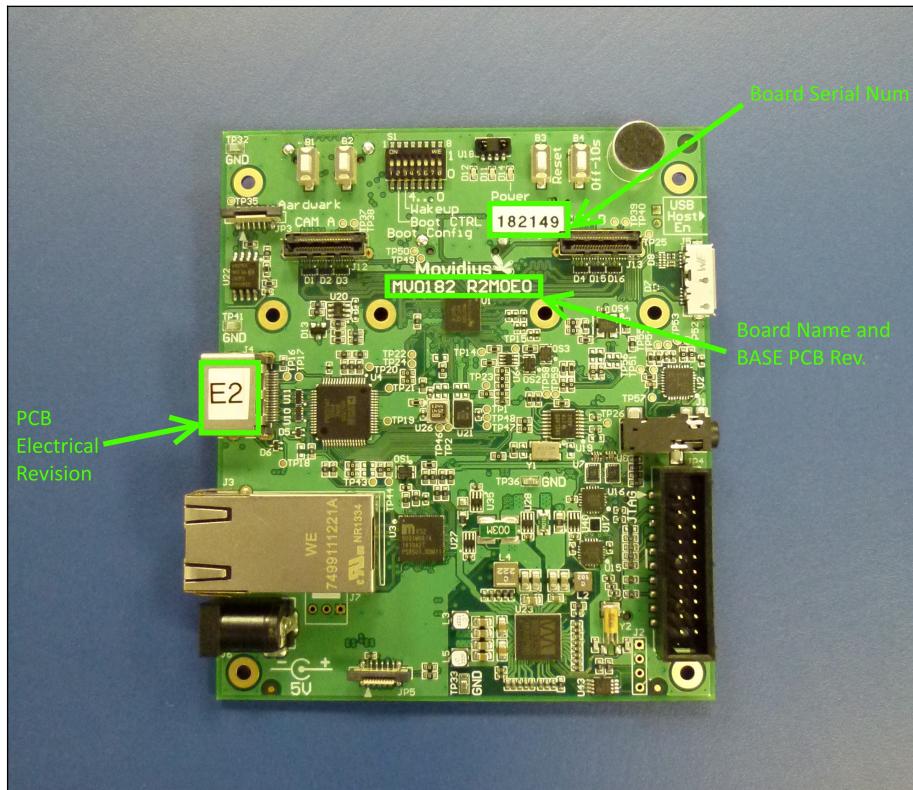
Identifying PCB Revision and Serial Number (MV0182-R2)
